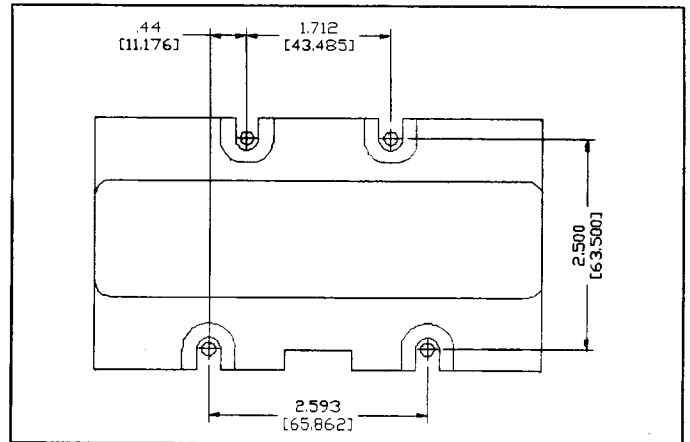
IQ Universal Power Sentinel™ Internal CT Drilling Pattern
